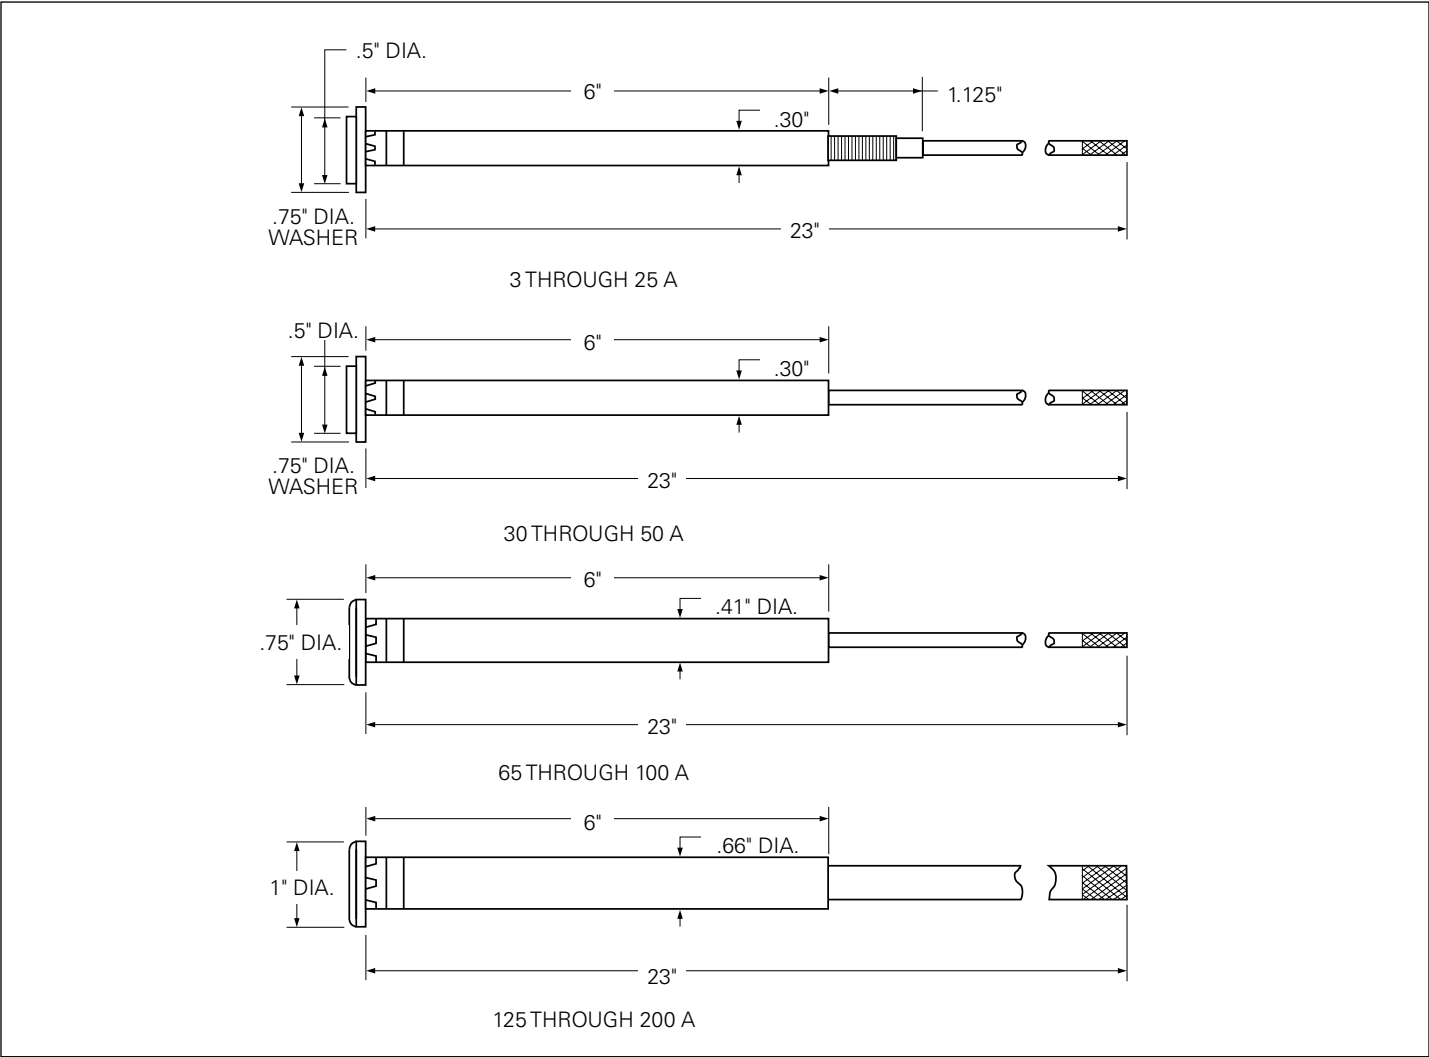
Dimensions of typical Type S Edison fuse links (non-removable buttonhead)
